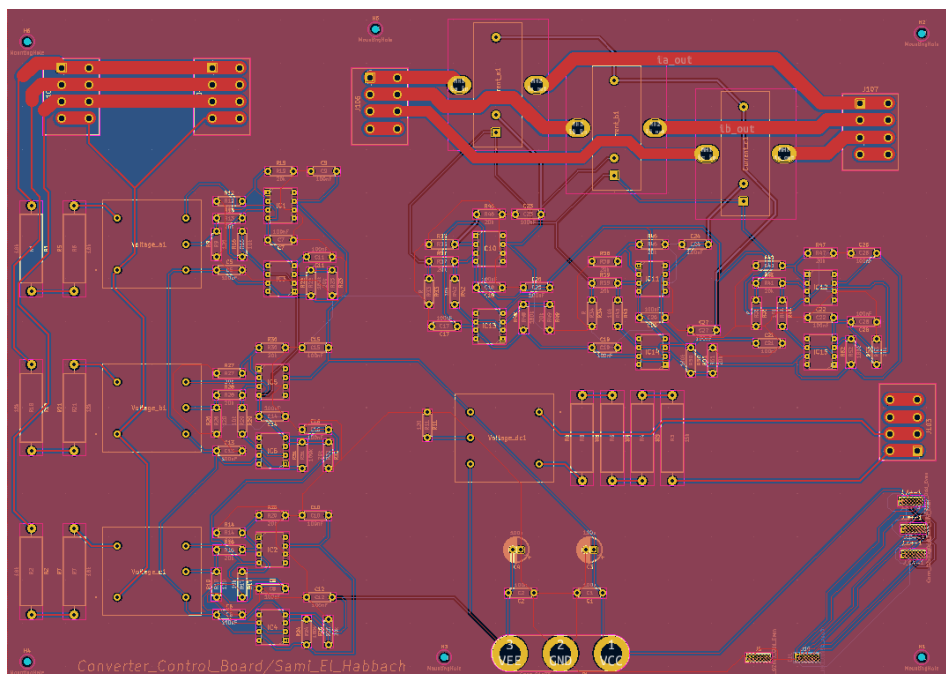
Converter control board PCB layout, showing all layers. The red lines are electrical connections/routes which are located at the top side of the board, while the blue connections/routes are located at the bottom of the board. The component mounting holes with connection to the pins of the electrical components are coloured yellow. The light blue mounting holes on the outer edges are mounting holes for the board.
